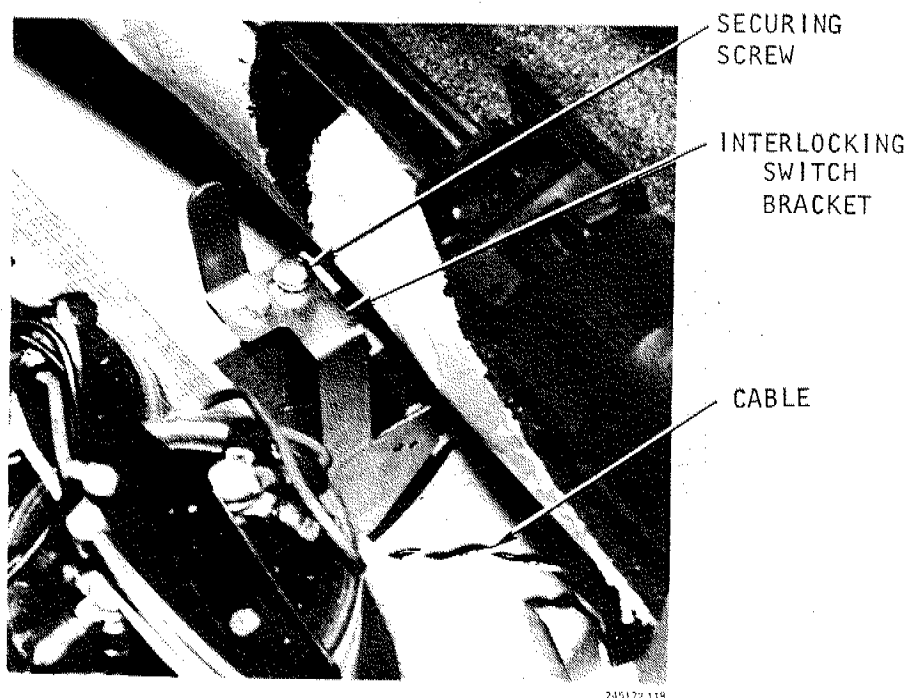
M-Series Paper Low Switch Interlock Assembly Removal/Replacement
